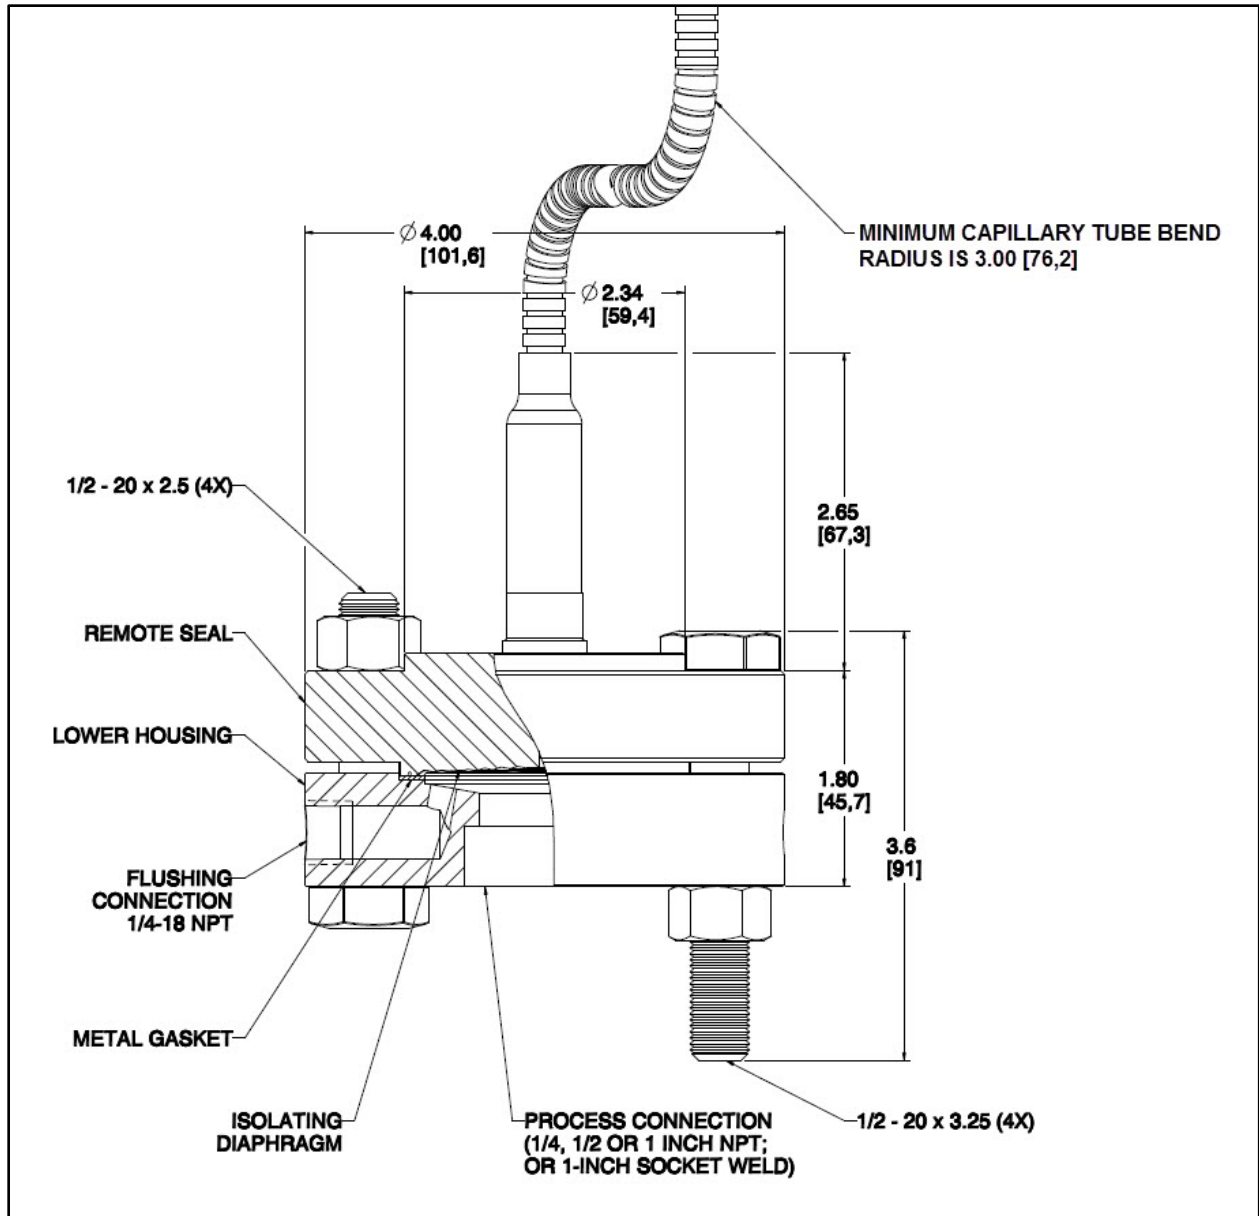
3159 Remote Diaphragm Assembly Dimensions ⁽¹⁾
